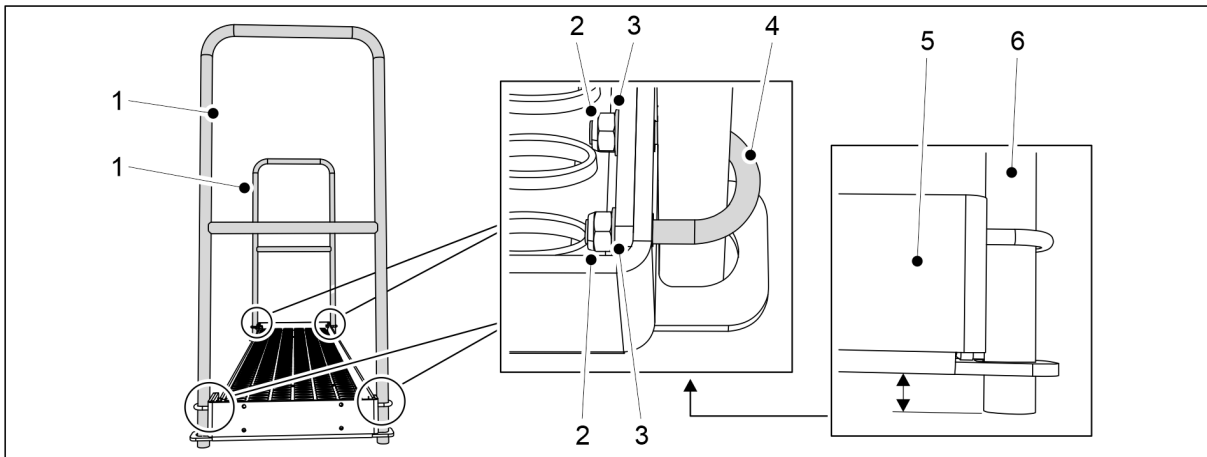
83. Mounting handrails on a 300 machine
